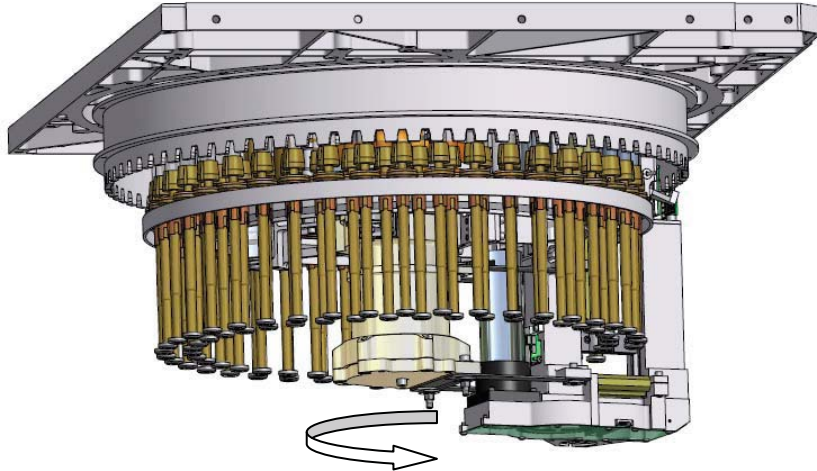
Center Hub Actuator Moves Rotating Elevator Frame and Sample Carousel Disk to Position a Sample Cup
